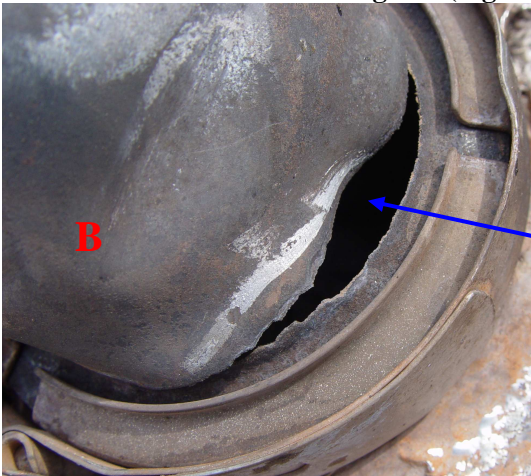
Turbocharger B, Exhaust outlet duct showing impact fracture (digital)
